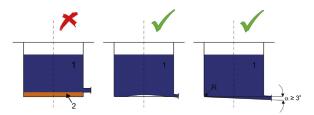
For good drainability and cleanability, open vessels, containers, and bins used in the processing of food (1) shall have their discharge outlet at the lowest level. Their bottom shall be sloped (more than 3 degrees toward the outlet), and their corners shall be well-rounded. Where food product and cleaning solutions are not allowed to drain, residual soil (2) will be left. Sharp corners (≤90 degrees) must be avoided (Lelieveld et al., 2003; Hauser et al., 2004b).
